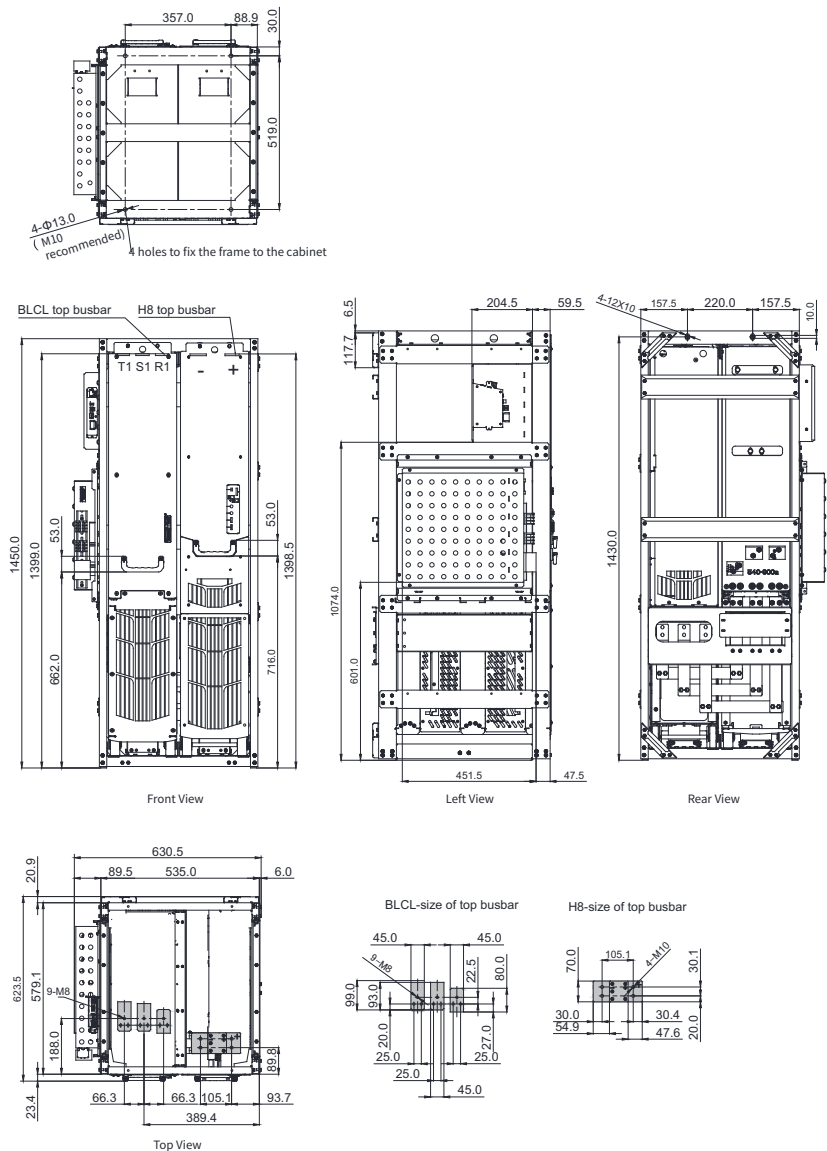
Dimensions of the active rectifier BLCL+H8 frame (mm)
